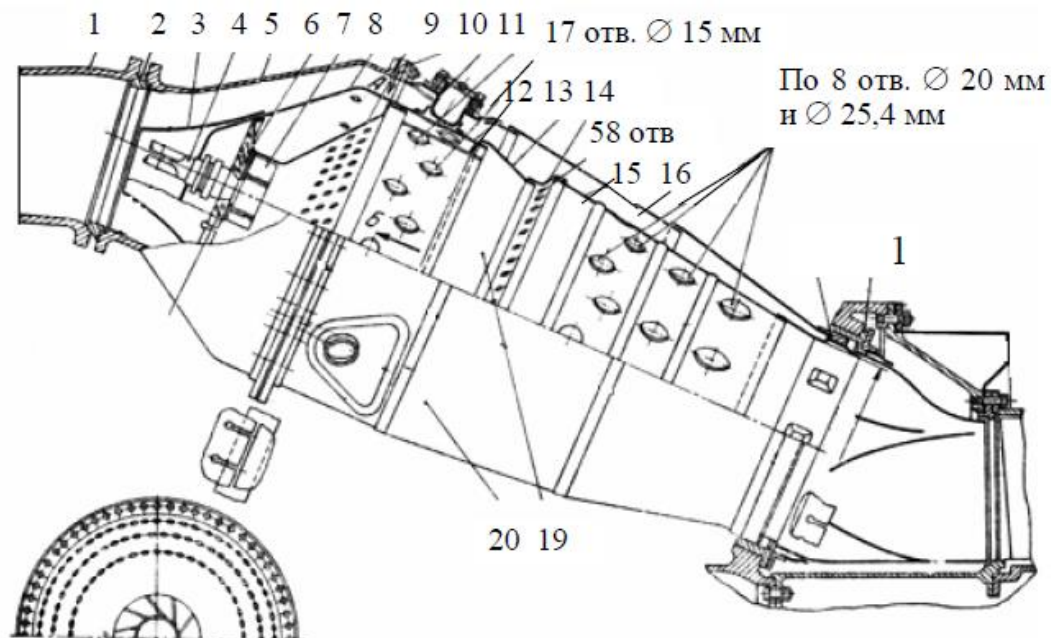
Tubular combustion chamber: 1 - compressor branch pipe; 2 - spherical steel ring; 3 - neck of the flame tube; 4 - nozzle; 5 - outer casing of the camera; 6 - small conical partition with holes; 7 - blade swirler; 8 - the front wall of the flame tube; 9 - large conical baffle with holes; 10 - spherical steel ring; 11 - centering glass; 12 - cylindrical part of the flame tube; 13 - conical part of the flame tube; 14 - connecting perforated ring; 15 - rear conical part of the flame tube; 16 - welded section casing; 17 - centering ring; 18 - bushing; 19 - fire tube; 20 - outer welded casing
